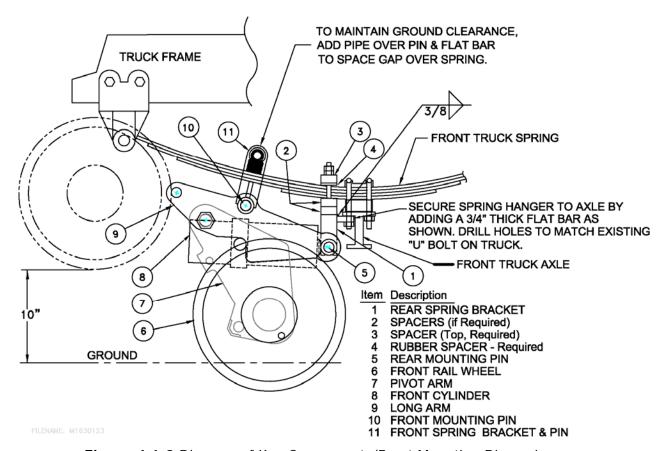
Diagram of Key Components/Front Mounting Dimensions
